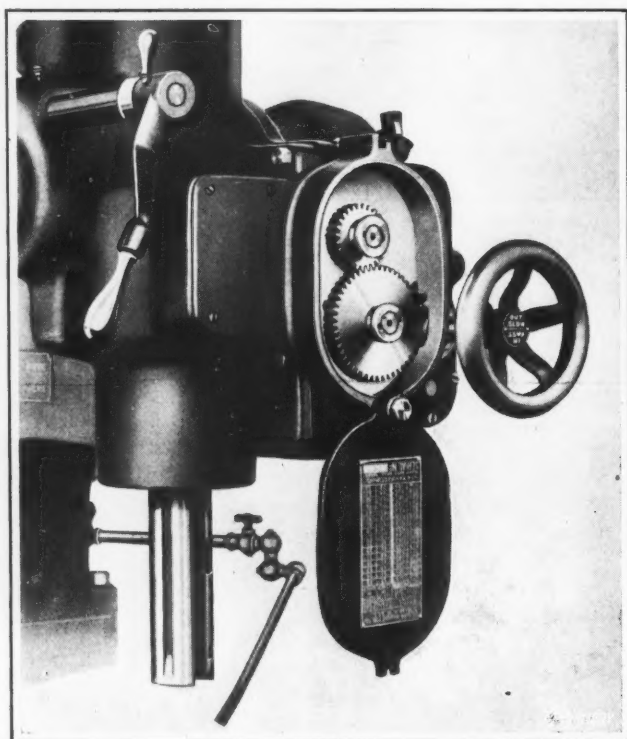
Close-up View of Feed-change Box on Front of Spindle Head
